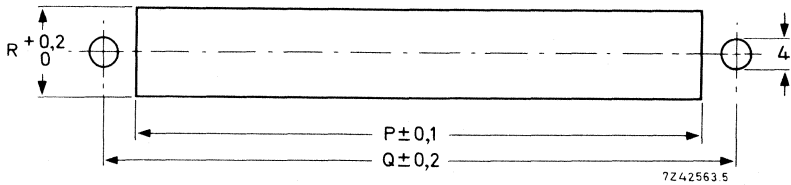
Piercing diagram for panel mounting; see Table 3 for dimensions P, Q and R. If bracket 4332 026 04630 and end piece 4332 026 04770 are used the circular holes are superfluous.
